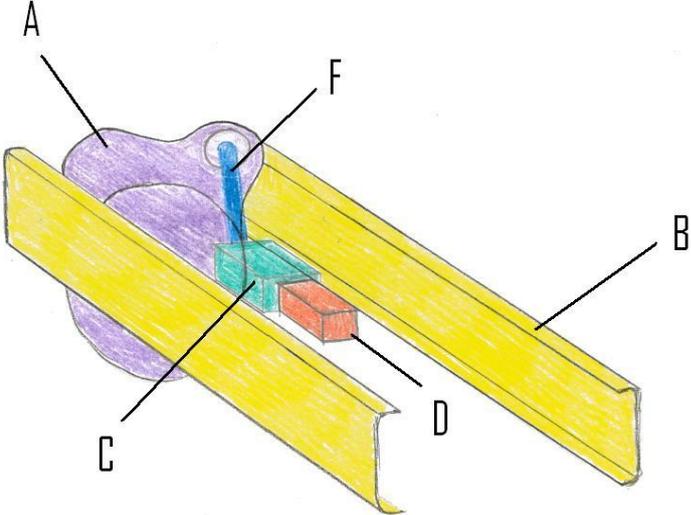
Concept 11. Both pumps are mounted on the chassis and a cardan shaft is connecting pump C to the PTO.
